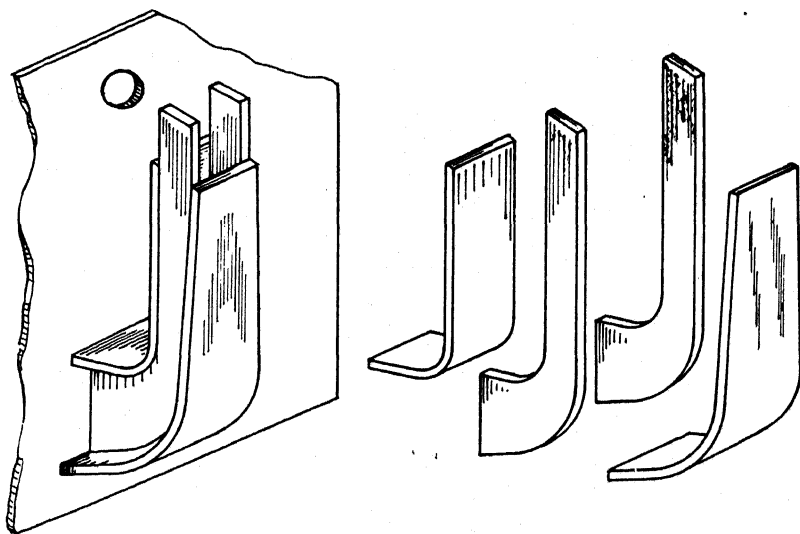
A bearing support for the side of a machine where a gear or flywheel is to be placed between the bearing and the side plate. Plates, cut and bent to shape and welded provide good rigidity at low cost. Capacity of the design is governed by the size and shape of the component parts.
